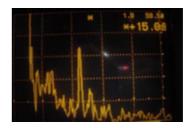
Video Mode Output using 2.25MHz-45degrees Ultrasonic Transducer at Brazed Dissimilar Metal Thread Joint.
